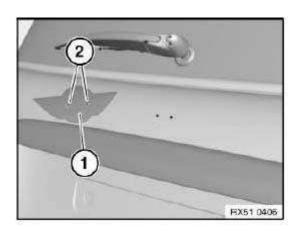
Identifying Adhesive Tape And Guide Pins Courtesy of BMW OF NORTH AMERICA, INC.
